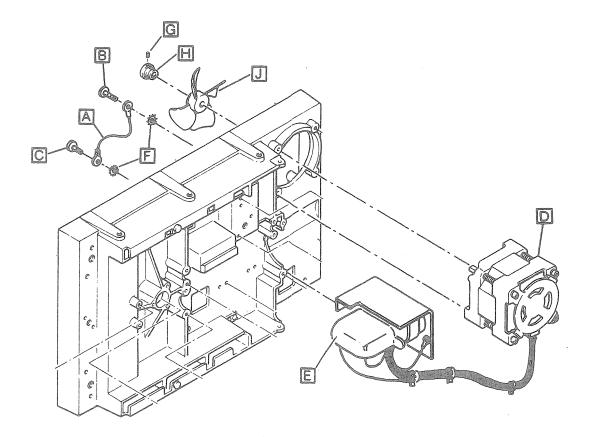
DRIVE MOTOR CAPACITOR, DRIVING PULLEY AND FAN ASSEMBLIES REMOVAL AND REPLACEMENT
